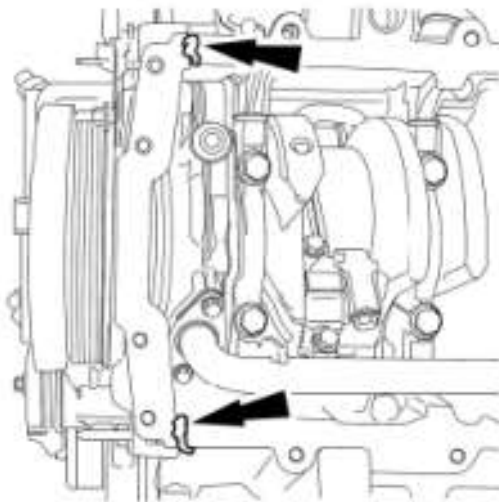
Locating Silicone Gasket And Sealant Area
